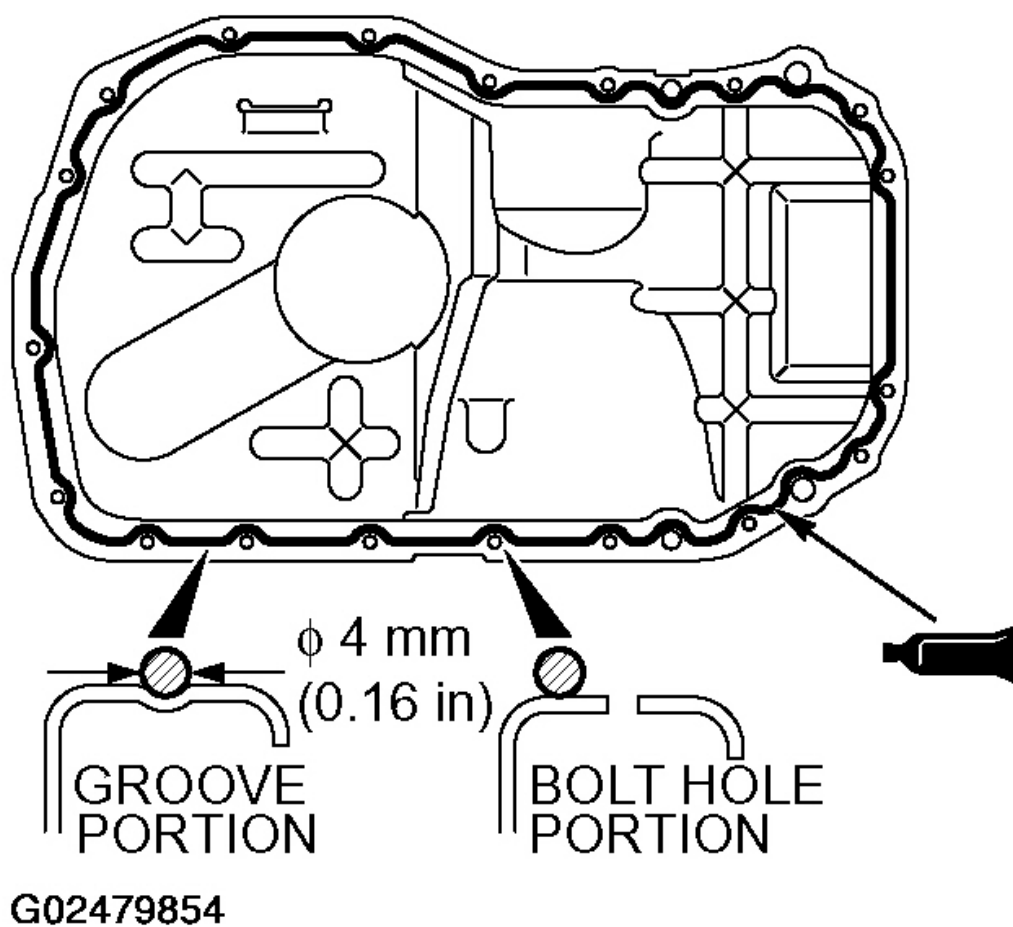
Applying Bead Of Sealant To Cylinder Block Mating Surface Of Engine Oil Pan
